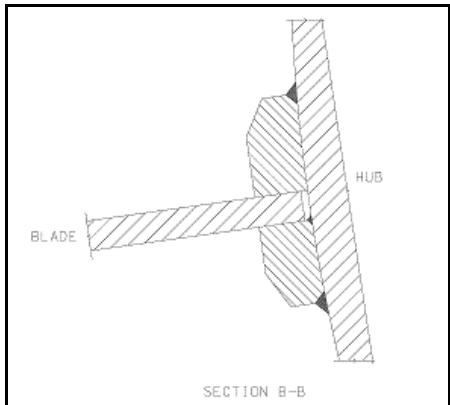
Section Showing Cross-section of Blocks Capturing Blade
